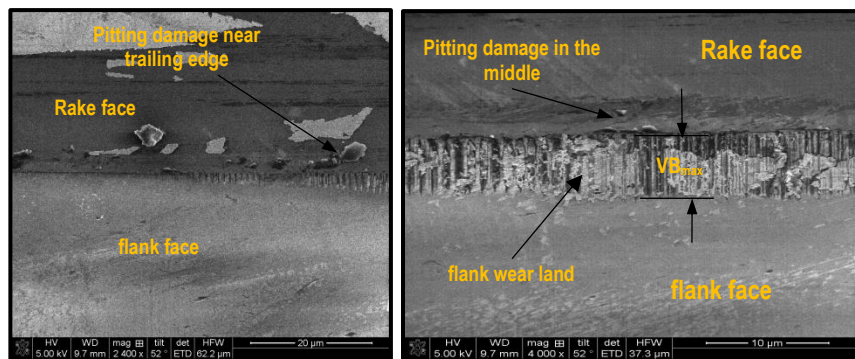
SEM image of flank and crater wear of -25° rake tool
